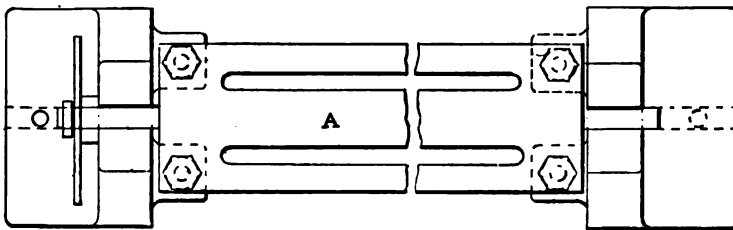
Grinding Fixture for Paper-cutting Knives.
